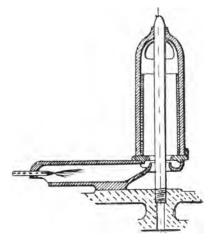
AUTOMATIC TUBE IGNITER-FIELDING
